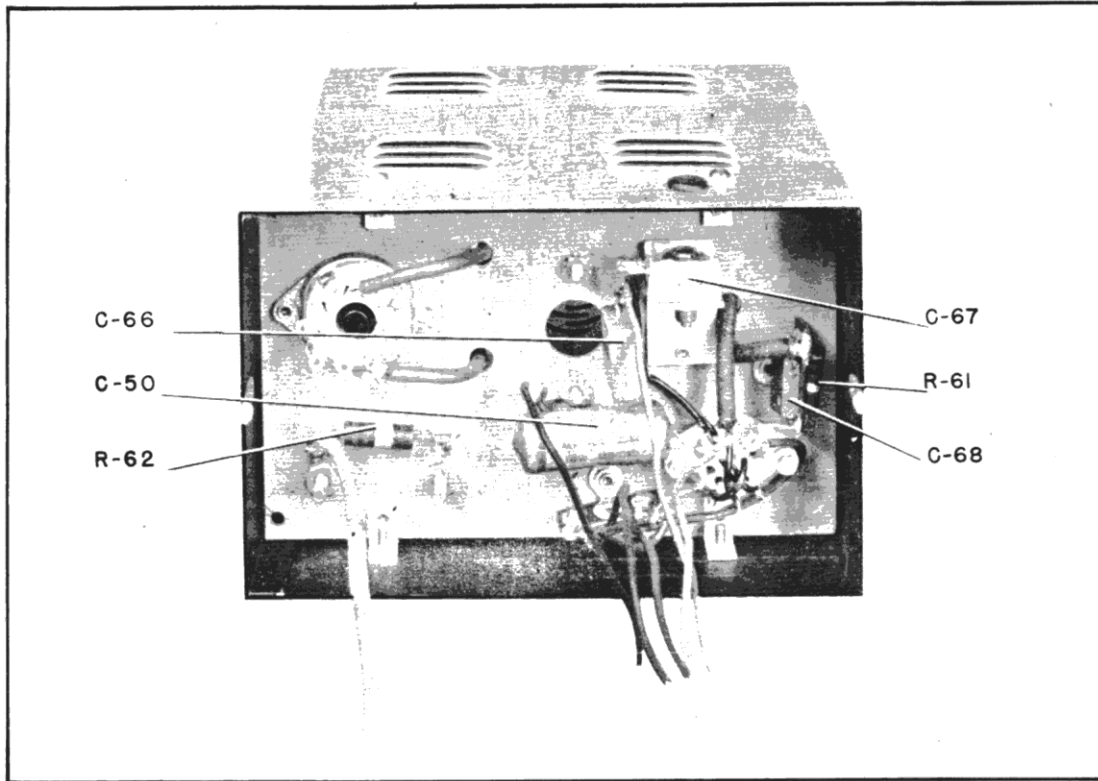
Bottom View of H.V. Power Supply Compartment (removed from chassis)
